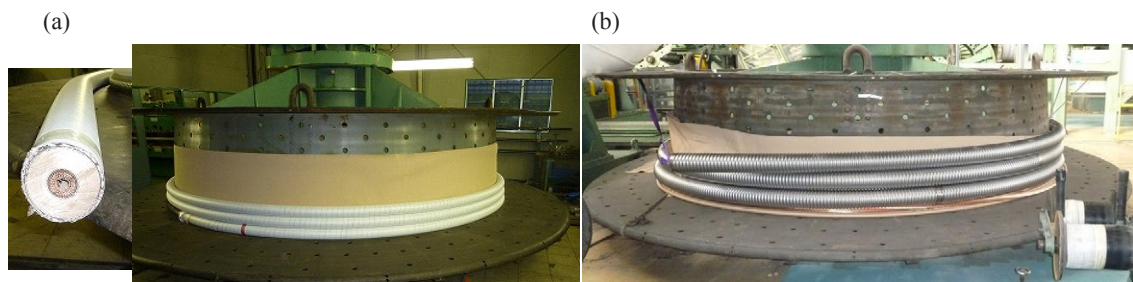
(a) Fabrication of HTS core including HTS conductor electrical insulation and Shield layer. (b) Fabrication of HTS core with cryostat pipe.
